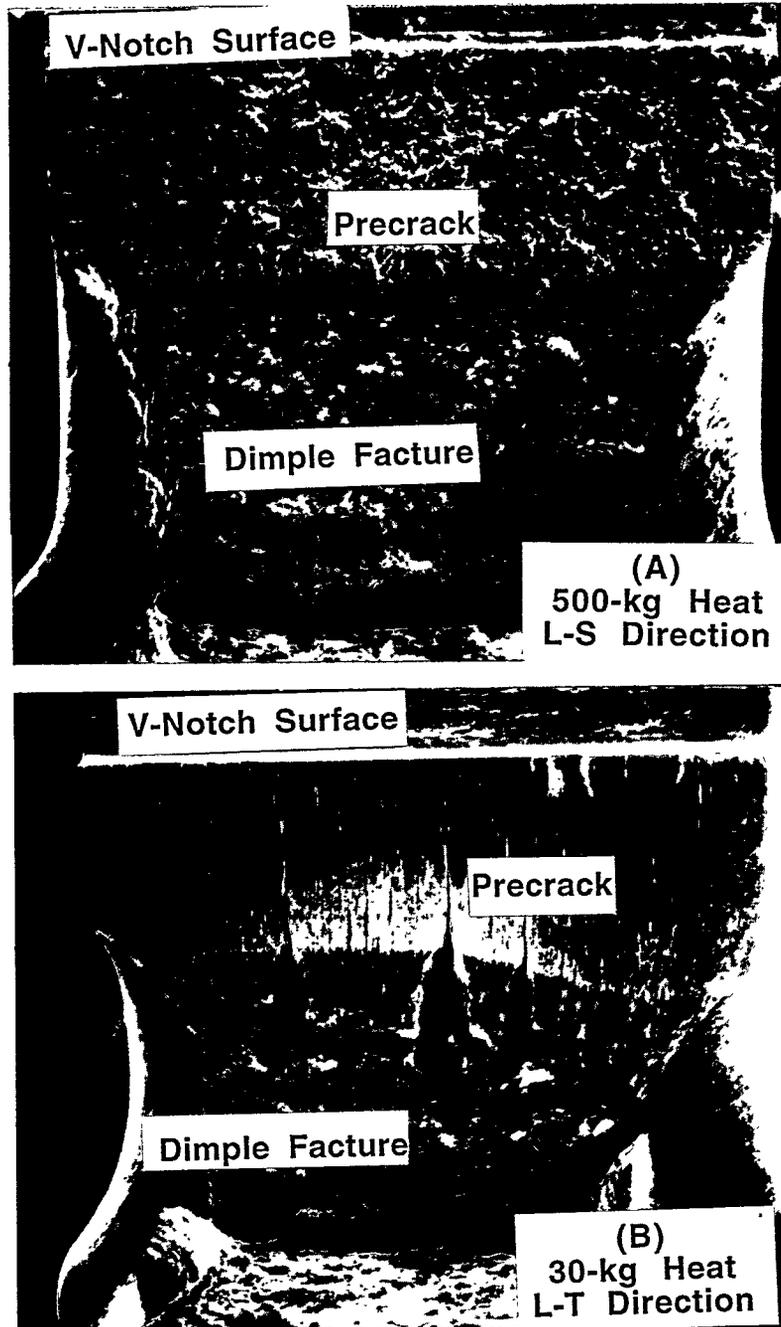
Appearance of precracking and impact-fracture surfaces in (A) production-scale heat (#832665) tested at -150°C ; and (B) laboratory-scale heat (BL-47) tested at 21°C
